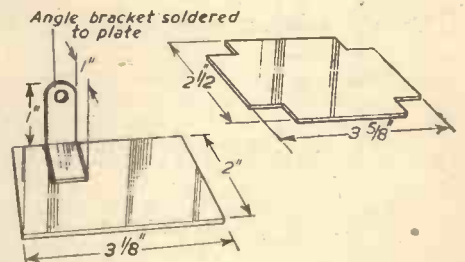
Metal backing for the mirrors shown bent to shape and in blank form.
